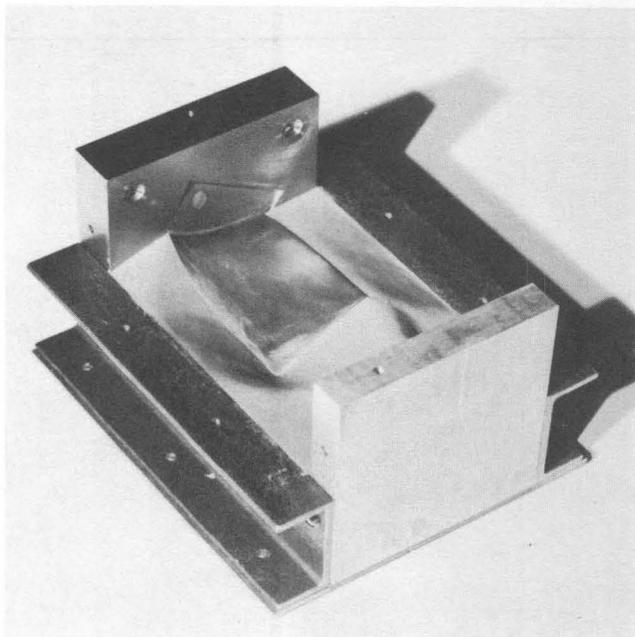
Mold box partially assembled showing clay parting surface trimmed at leading and trailing edges of the master blade.
